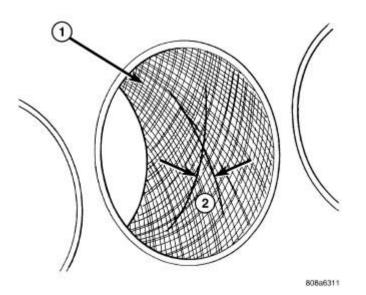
CYLINDER BORE CROSS-HATCH PATTER Courtesy of CHRYSLER LLC
